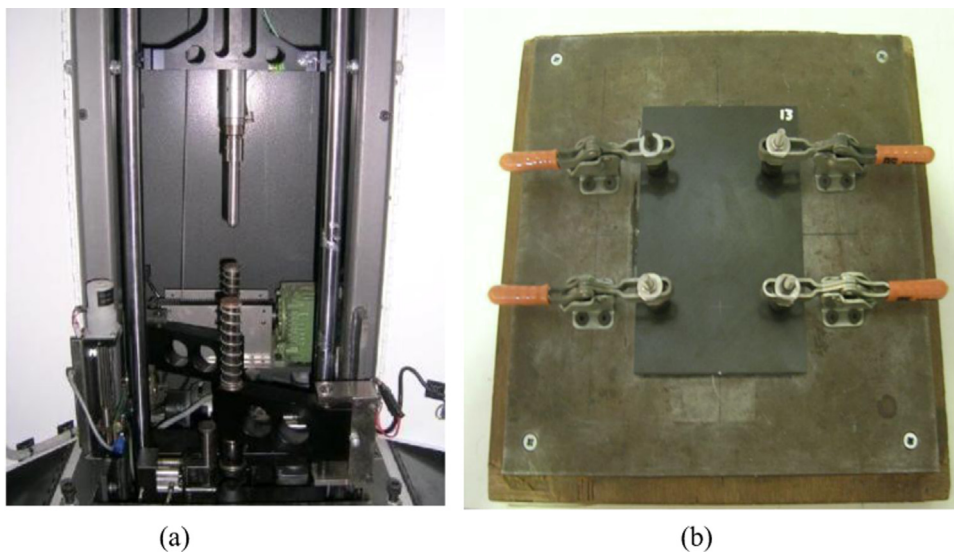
(a) The weight-drop machine used for impact generation and (b) specimen support fixture.
